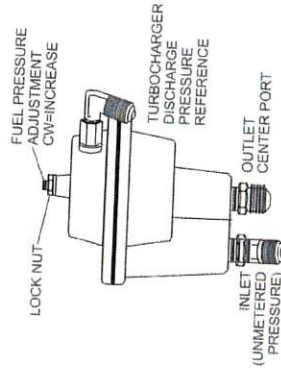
Fuel Pressure Regulator, Turbocharged Engine
